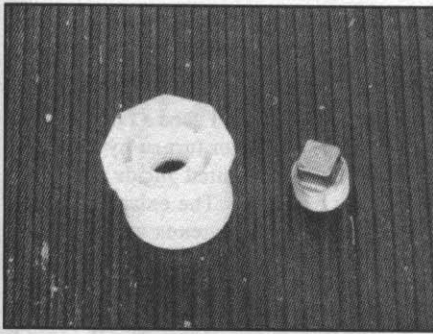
Modified STX bushing turned to fit inside the end of tuning coil.
